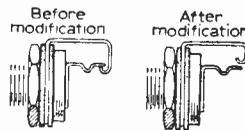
Jack socket modifications—note that the insertion of the earpiece plug will cause the modified contact to touch the fixed contact, and so complete the d.c. supply to the oscillator.
